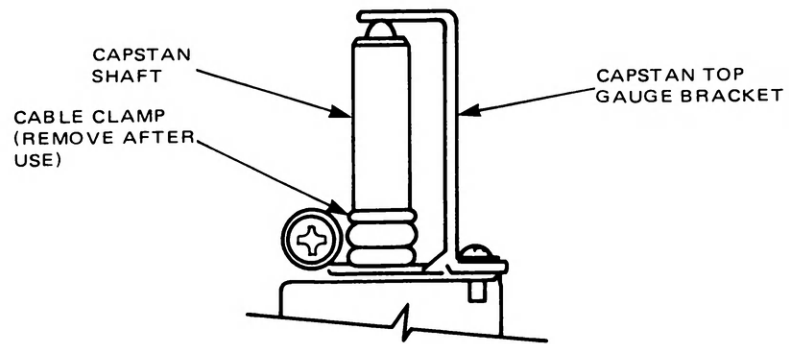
Setting Capstan Elevation/Thrust Wand Preload
